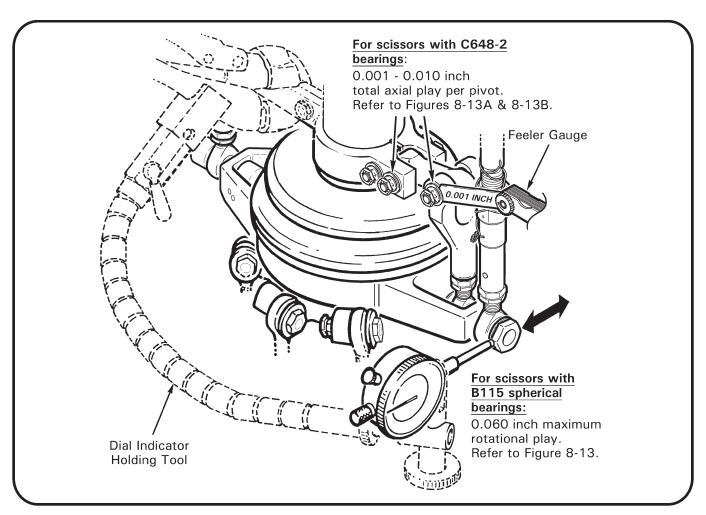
MEASURING UPPER SWASHPLATE ROTATIONAL PLAY (Identify scissors bearing type and measure as shown)
